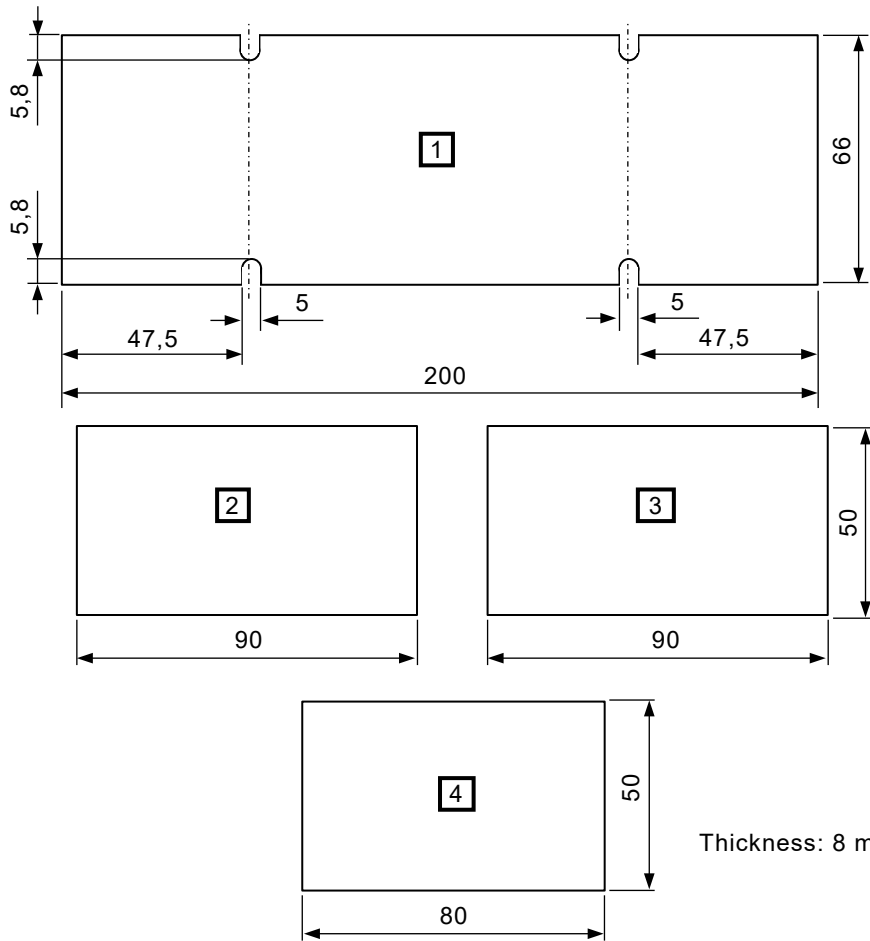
shows the connector attachments. The hole sizes of the connector attachments depend on the selected connector.
